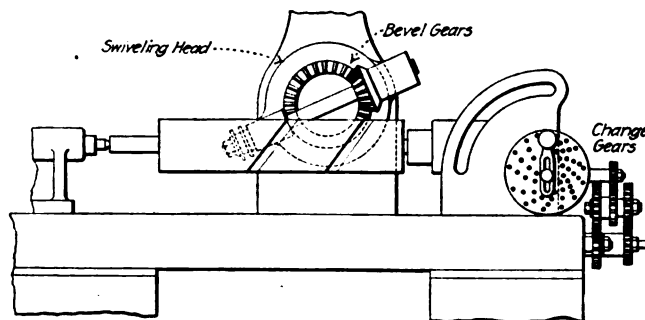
MILLING MACHINE ARRANGED FOR GROOVING
